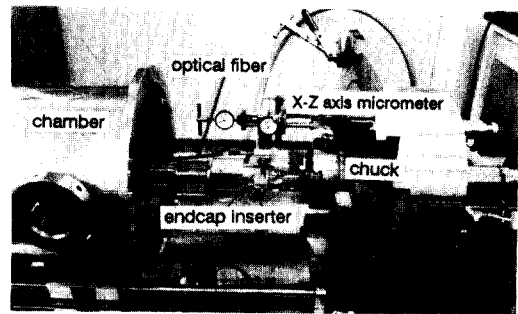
Photography of welding chamber for end cap welding.
